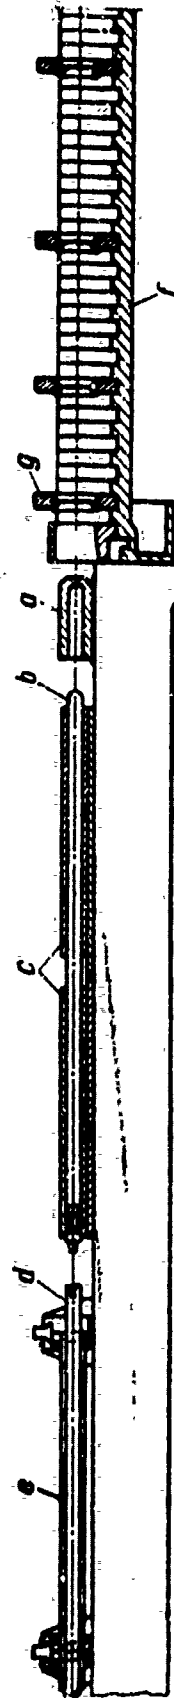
Principle of Roller Die Push Bench. (a) Tube blank; (b) mandrel; (c) mandrel guide; (d) push rod guide; (e) roller die; (f) die bed.
